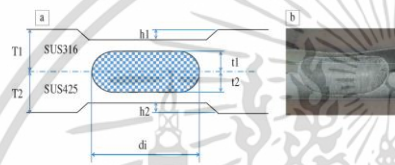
(a) Schematic illustration of the weld zone
